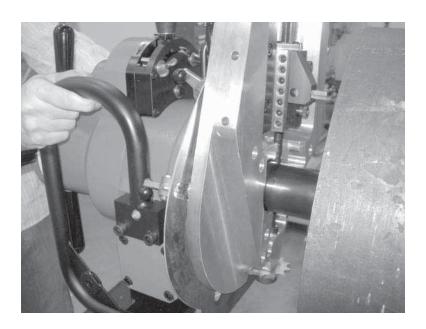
Push the machine forward on the mandrel until you can engage the mandrel threads in the feed nut.
